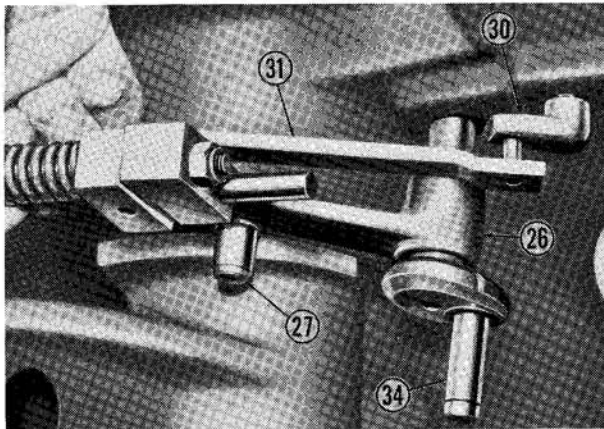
Removing position control linkage and control lever shaft. Refer to Fig. 210 for legend.
